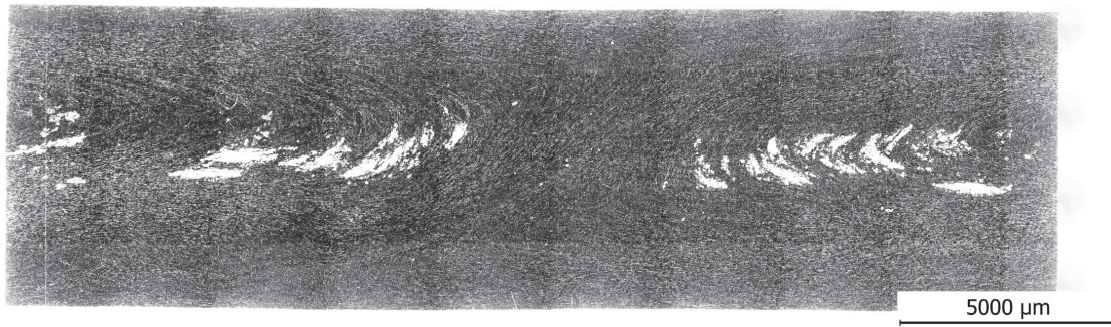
Polish number 1 of the insert type blade, position 0.34 mm from nozzle side. Pushing the insert back the weld line area grows broader. The side weld lines described in Fig 5.32 also grow wider and become hard to distinguish from the modified part of the weld line.
